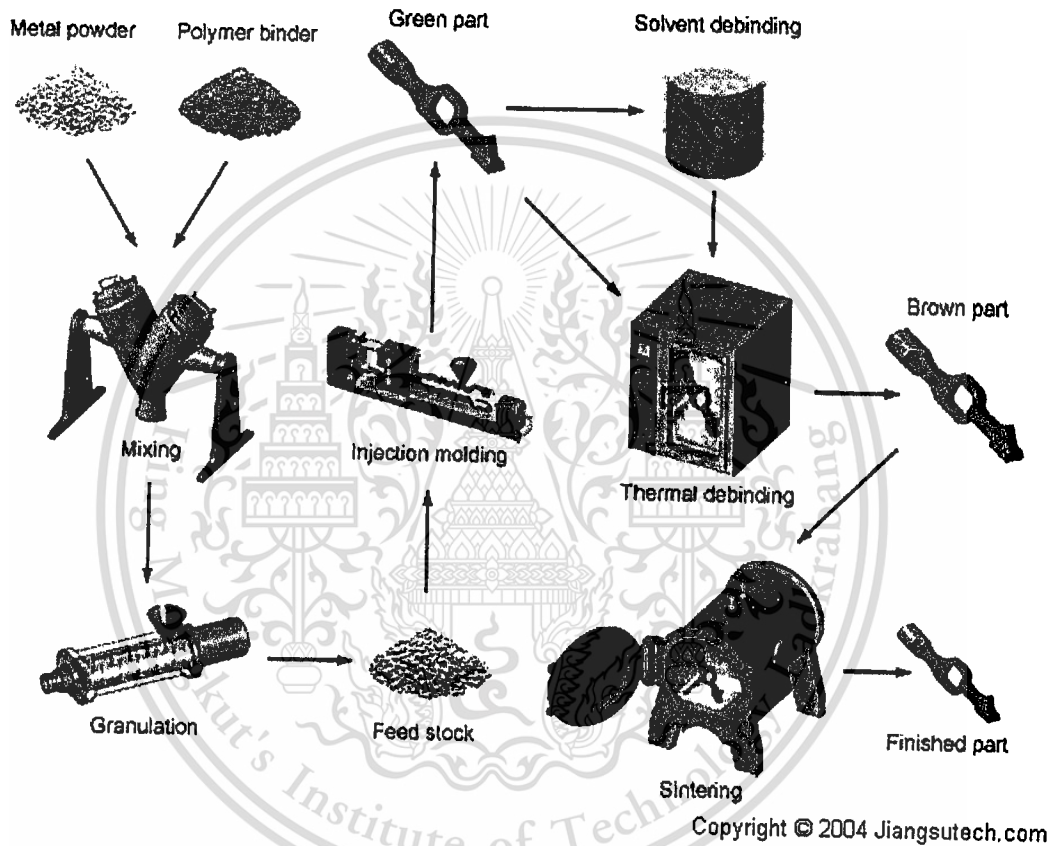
Metal injection moulding process (<http://www.prlog.org/11733325-metal-injection-molding-mim-parts.html>)
